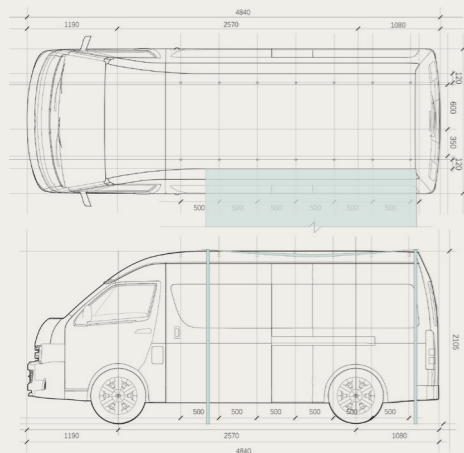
Exterior Conversion Plans and Sections Drawn by author.
